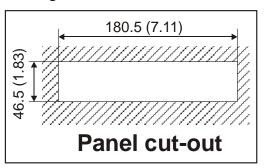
Panel Cut-Out Dimensions for User Interfaces, mm (in.)
